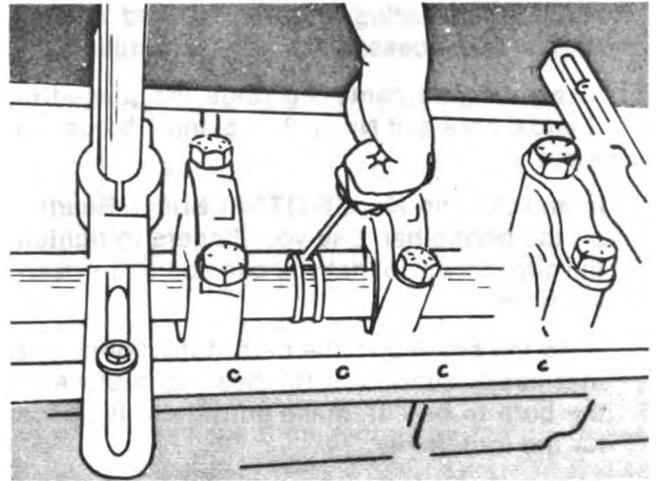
Install The Tool Holder Onto The Boring Bar.
